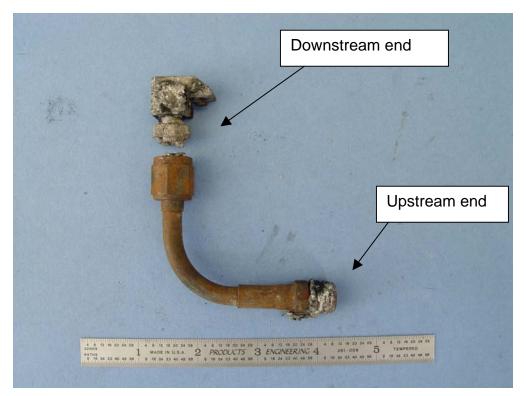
Stainless steel elbow with large portion of an aluminum fitting
